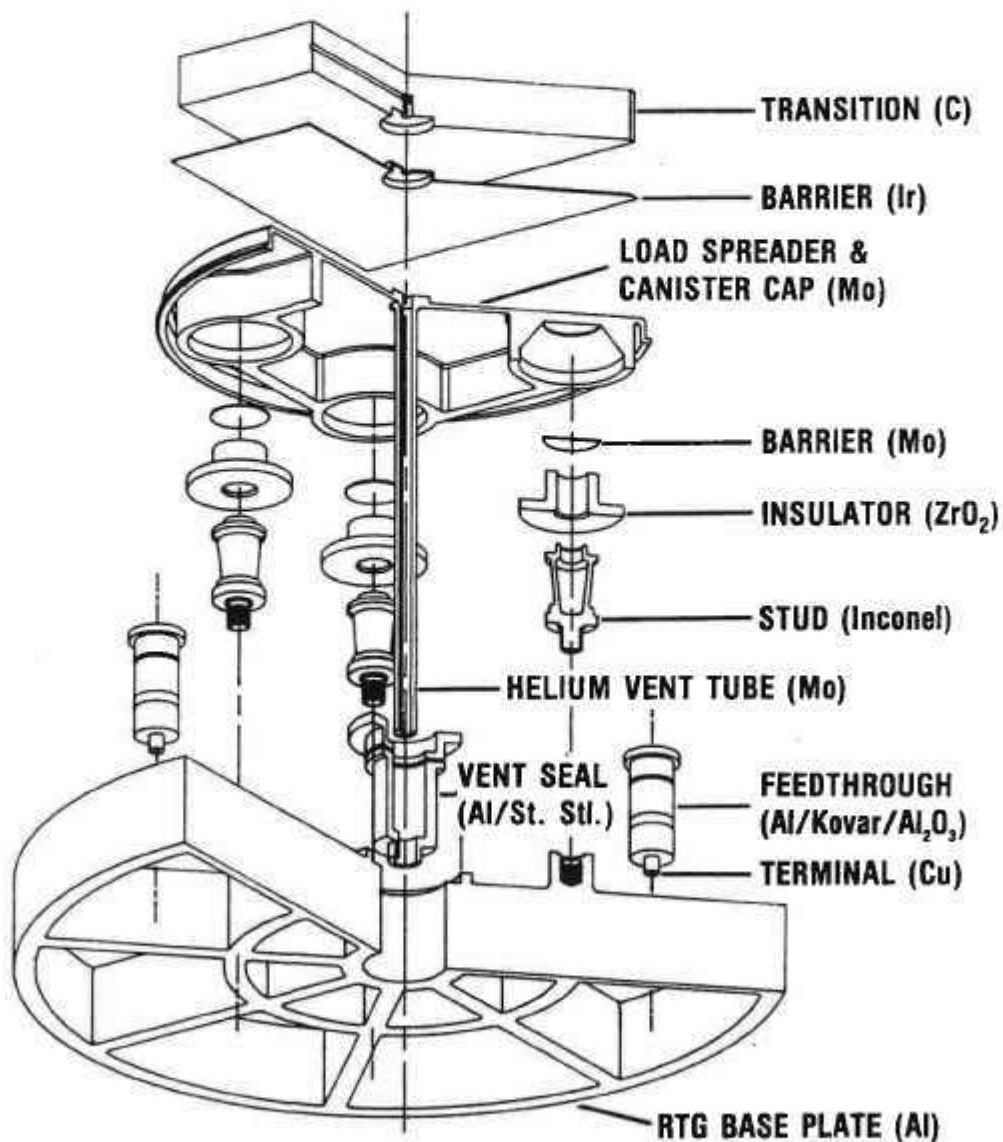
shows an exploded view of the heat source's lower support structure (viewed from below), and Figure 17 shows a cutaway view of the lower end of the assembled RTG. As can be seen, the lower support structure uses an identical set of load spreaders, zirconia insulators and Inconel studs as the upper support structure. But there are no springs, and the studs are mounted directly on the RTG's aluminum base plate. The base plate employs 1" x 0.25" radial and circumferential ribs to provide the required stiffness.
